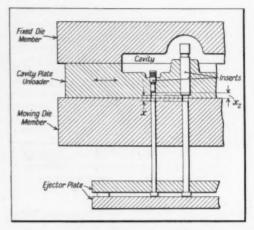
Sectional View of a Tool with a Reciprocating Cavity Plate/Unloader
